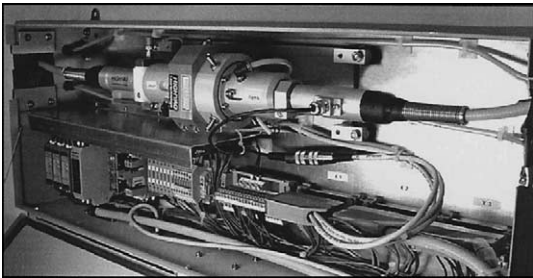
Optical heads with cross-jet integrated for weld without material addition.
